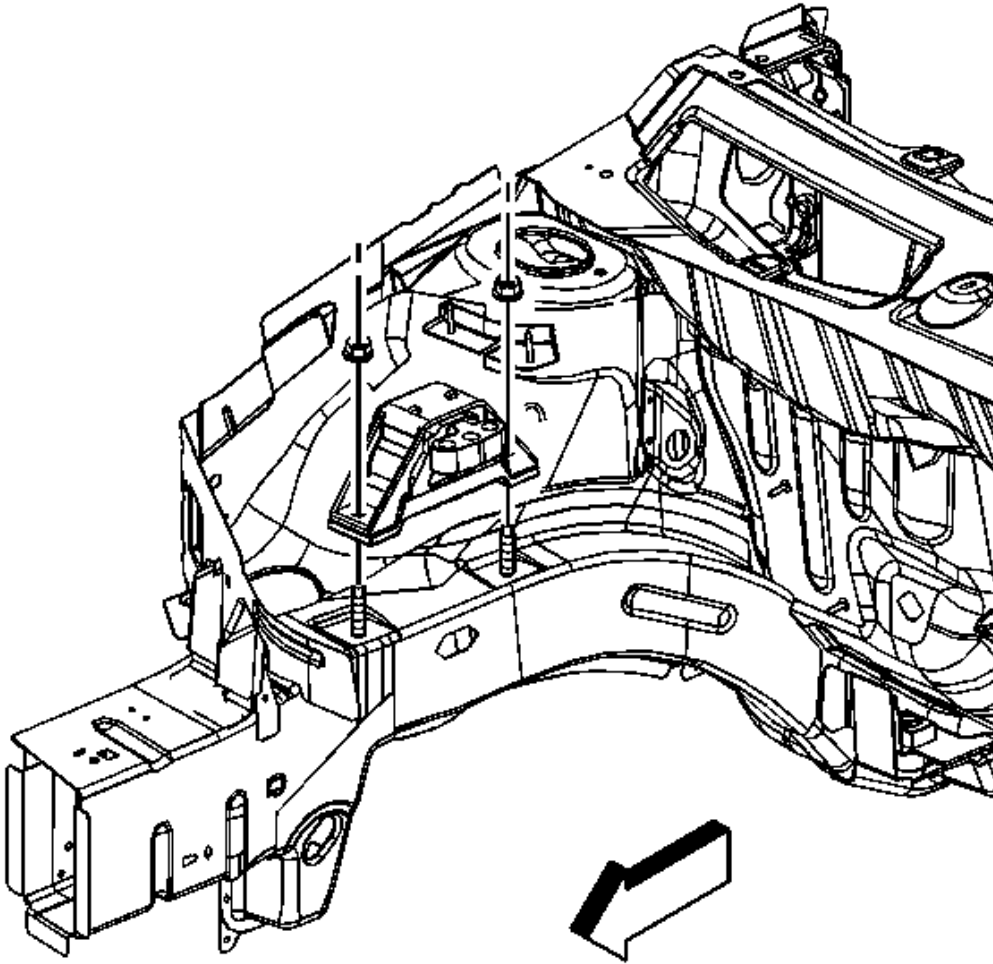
View Of Right Engine Mount To Frame Rail Nuts
